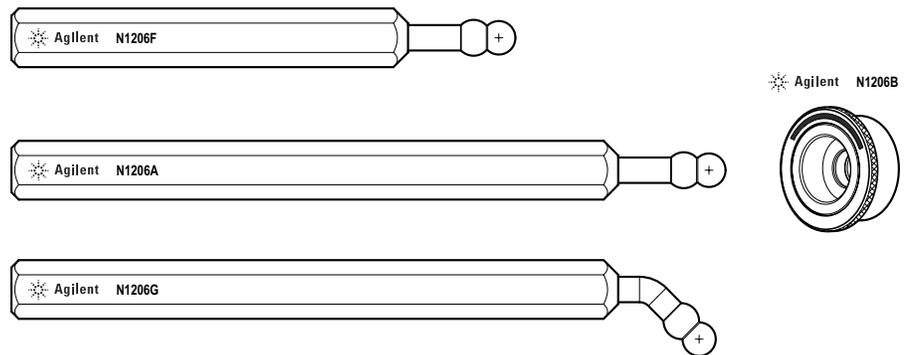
Agilent N1206T Adjustment Tool Kit
